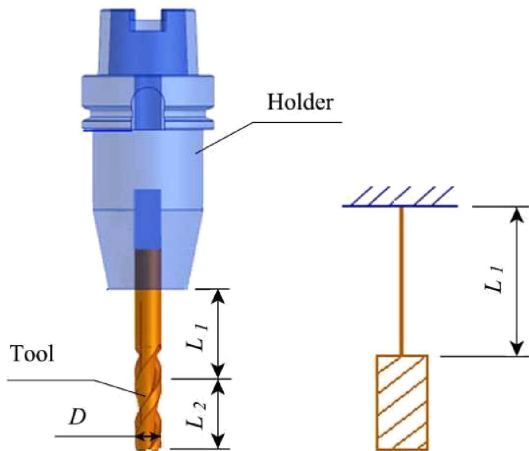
Drawing of the mounting tool holder: D – tool diameter, L_1 – free length of the tool measured from the holder end to the point of contact of the tool edge with the work piece material
